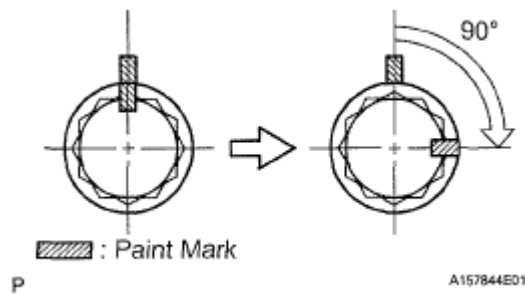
Identifying Crankshaft Bolt Tighten Angle
